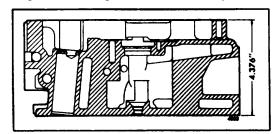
Minimum Distance Between Top and Bottom Faces of Cylinder Head
